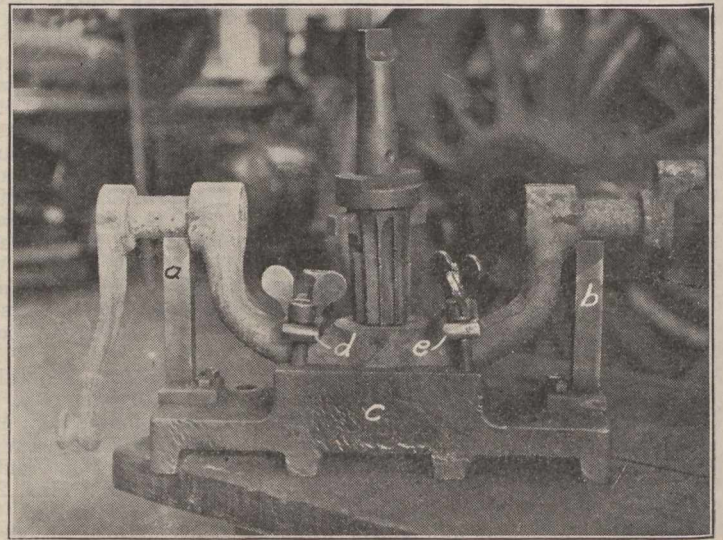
First Drilling Operation in Bell Hanger Boss.
